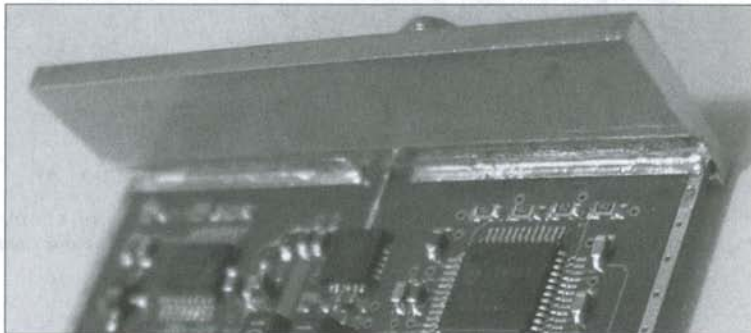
The brass profile was soldered with the circuit board (top and bottom side). At the position where the microstrip line meets the brass, a 50Ω feedthrough was placed and soldered. A 2.92mm connector is placed at the backside of the profile and soldered to it
